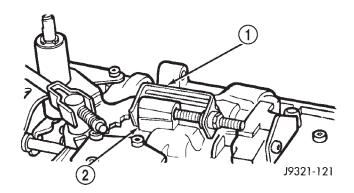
Securing Detent Ball And Spring With Retainer Tool
